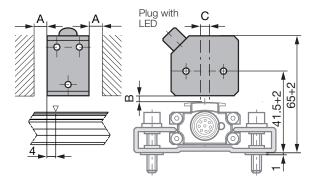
Dimensions and distances with BTL5-P-4500-1 electromagnet (24 V/100 mA)
